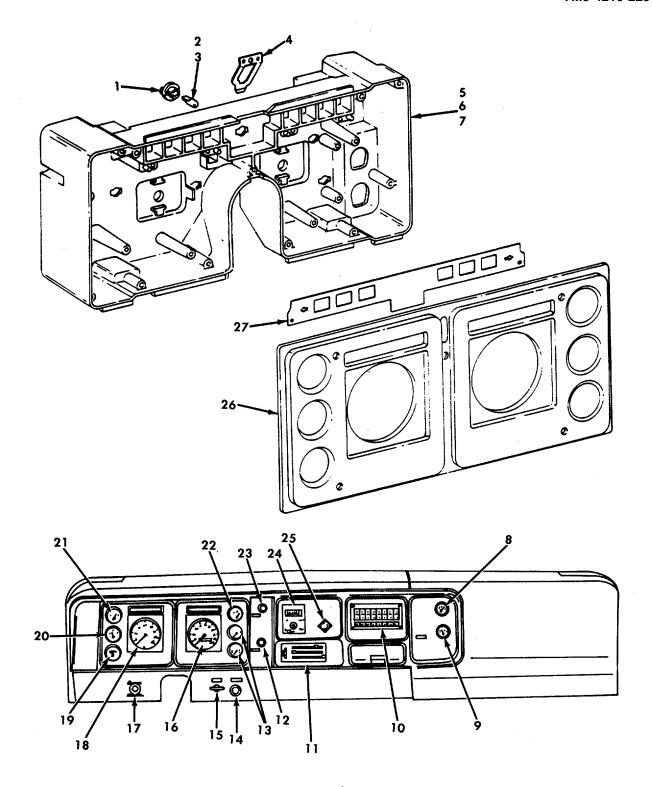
INSTRUMENT PANEL ASSEMBLY
